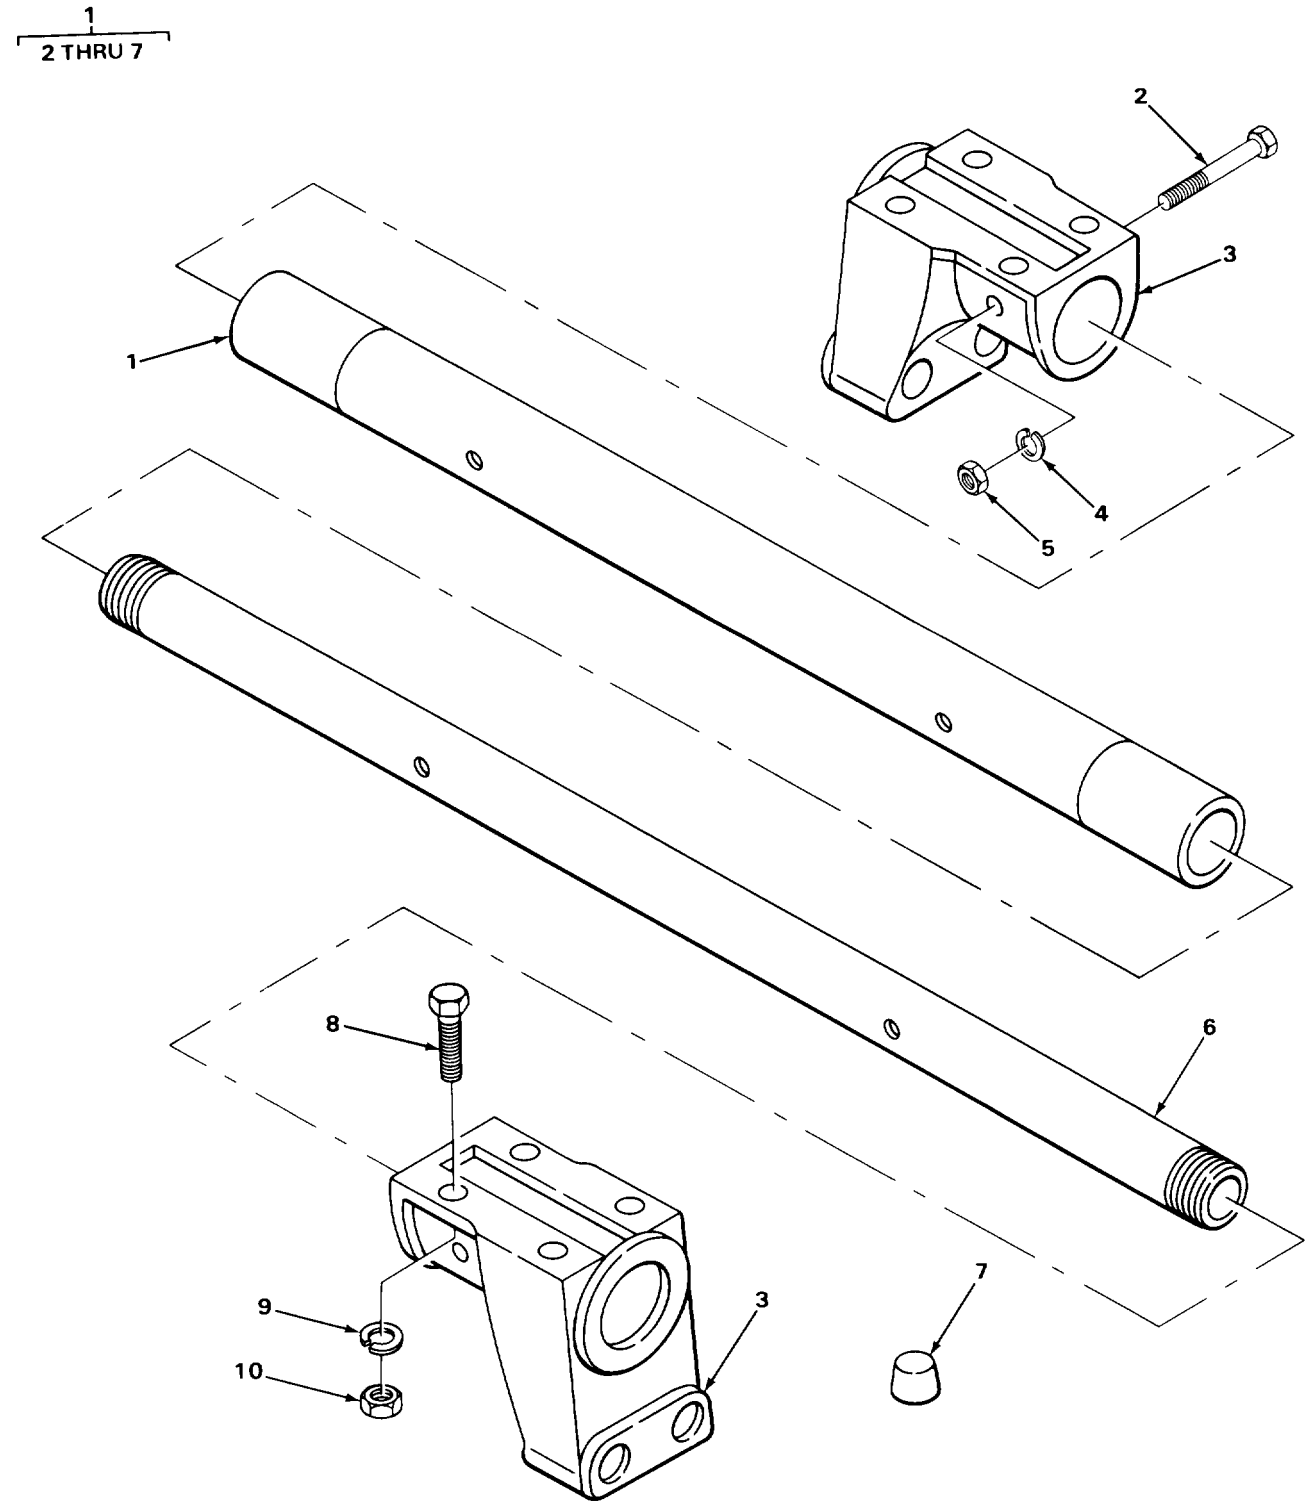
AXLE ASSEMBLY (USE ON PAO1UX THRU PAO21W).
